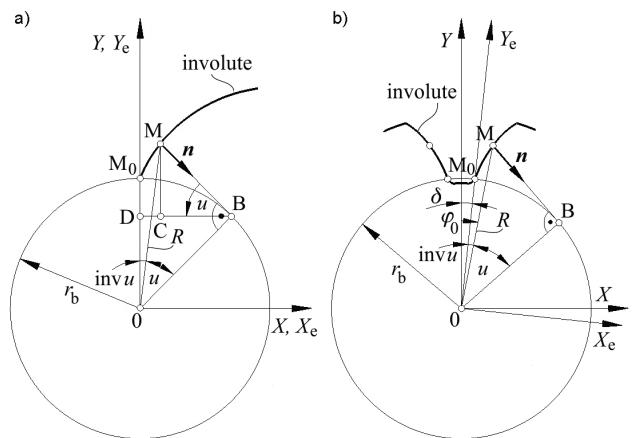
The profile of: a) the involute, b) the gear wheel tooth
